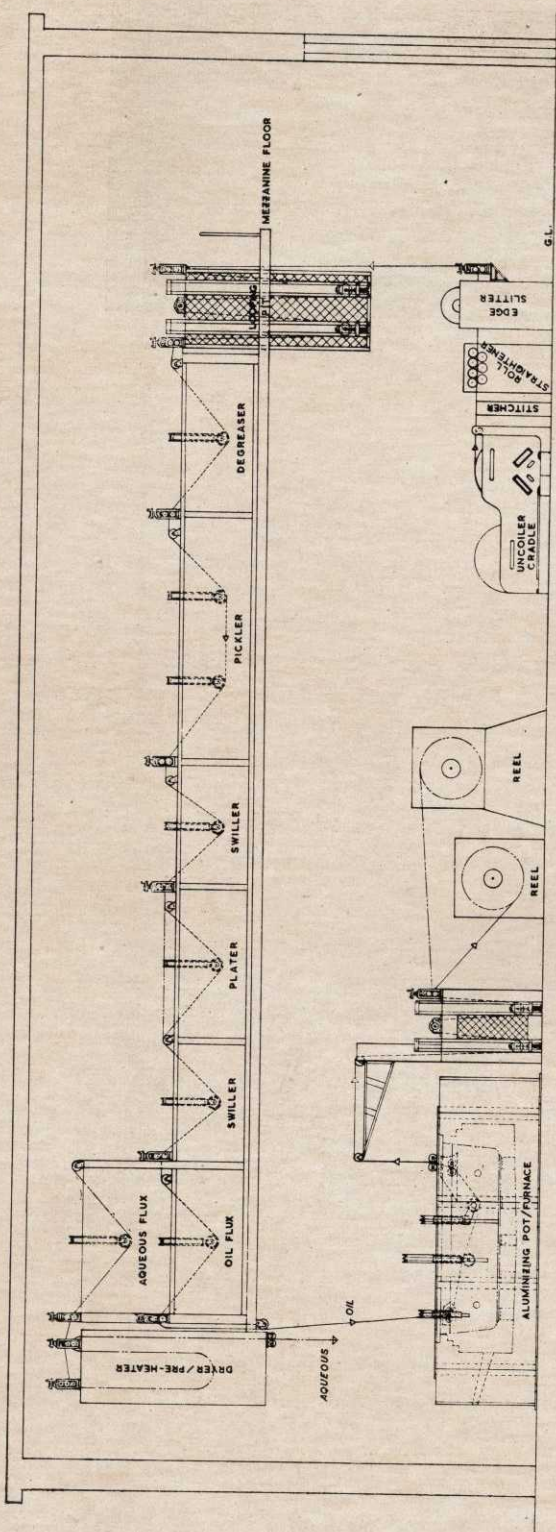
STRIP ALUMINIZING PLANT (SCHEMATIC LAYOUT)
